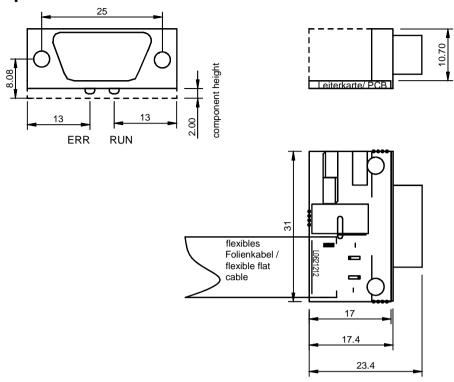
Dimensioning CANopen Assembly Interface (AIFX-CO)
